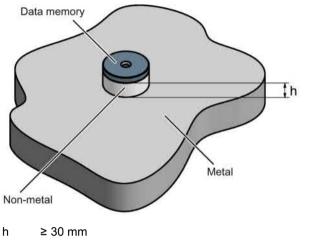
Mounting the MDS D139/D339 on metal with spacer
